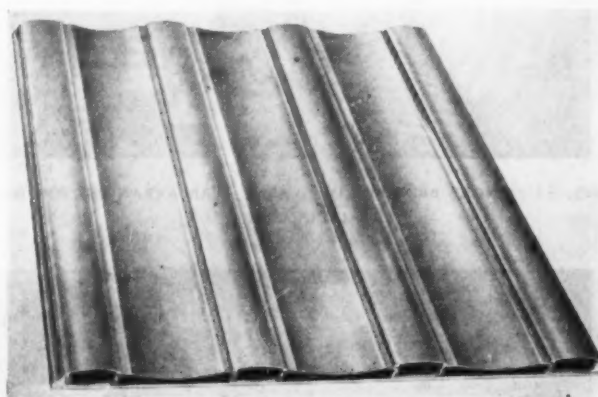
DETAIL OF FLUTED STAINLESS STEEL OR ALUMINUM SIDE SHEATHING
